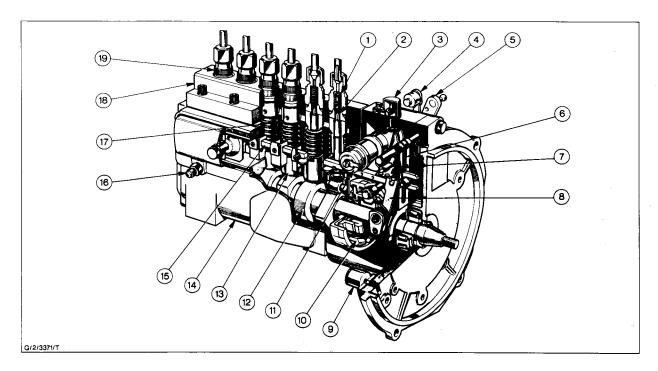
CAV Minimec Injection Pump - Dover Type
